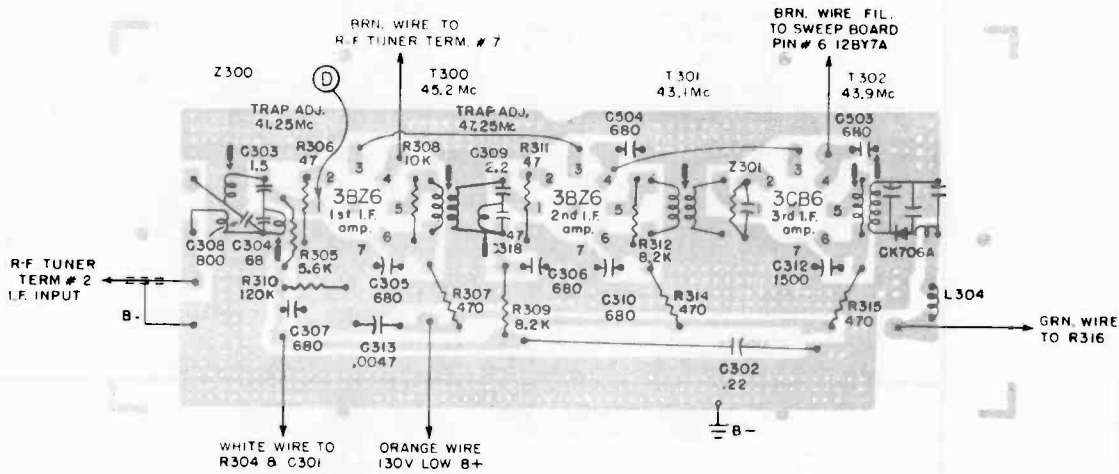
Bottom View of IF Printed Board Showing Top Components Symbolically
